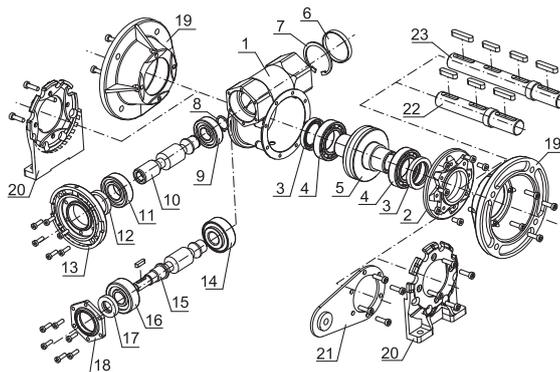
/2 Spare parts-Worm gearboxes MRP
